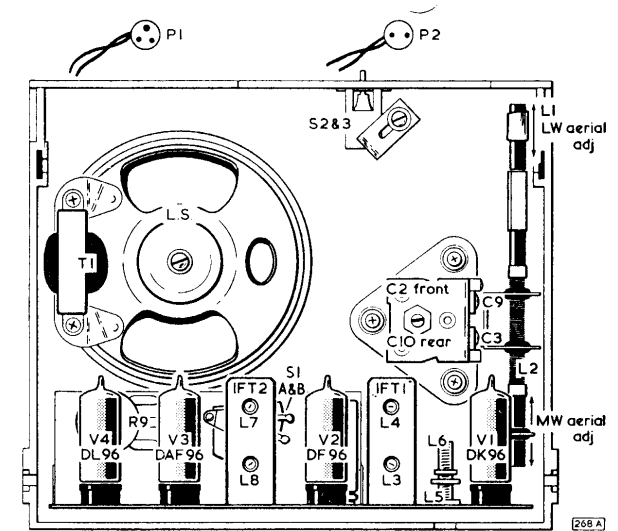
Rear view of receiver showing location of main components and alignment trimming adjustments.
